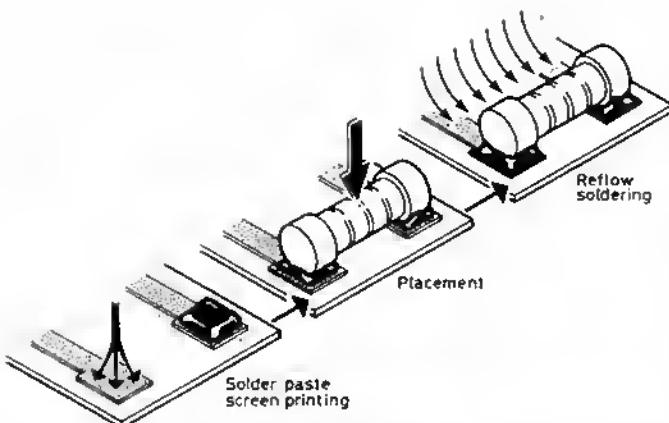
A standard procedure for fixing surface-mounted components on the upper side of printed circuit boards, using solder paste screen printing
